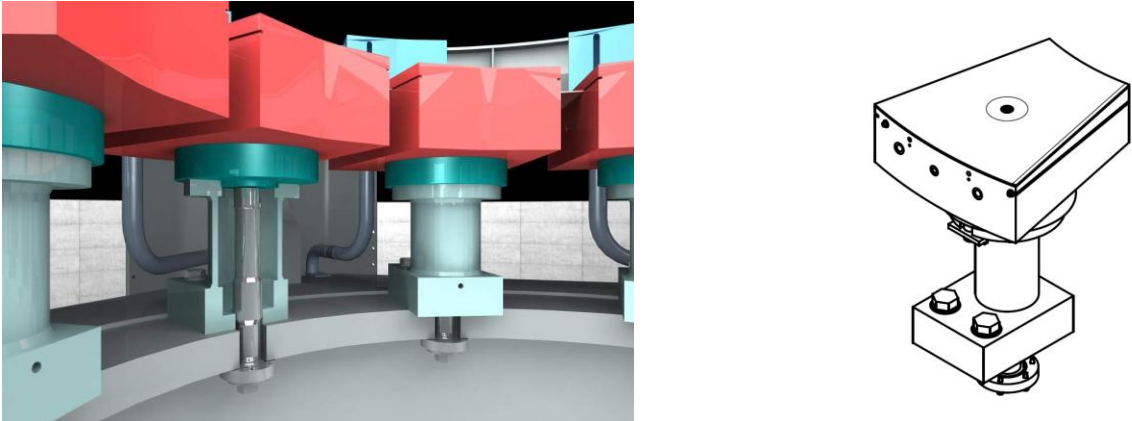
The pivoted thrust bearing pad supported on the adjustable spindle (ALSTOM Hydro)
